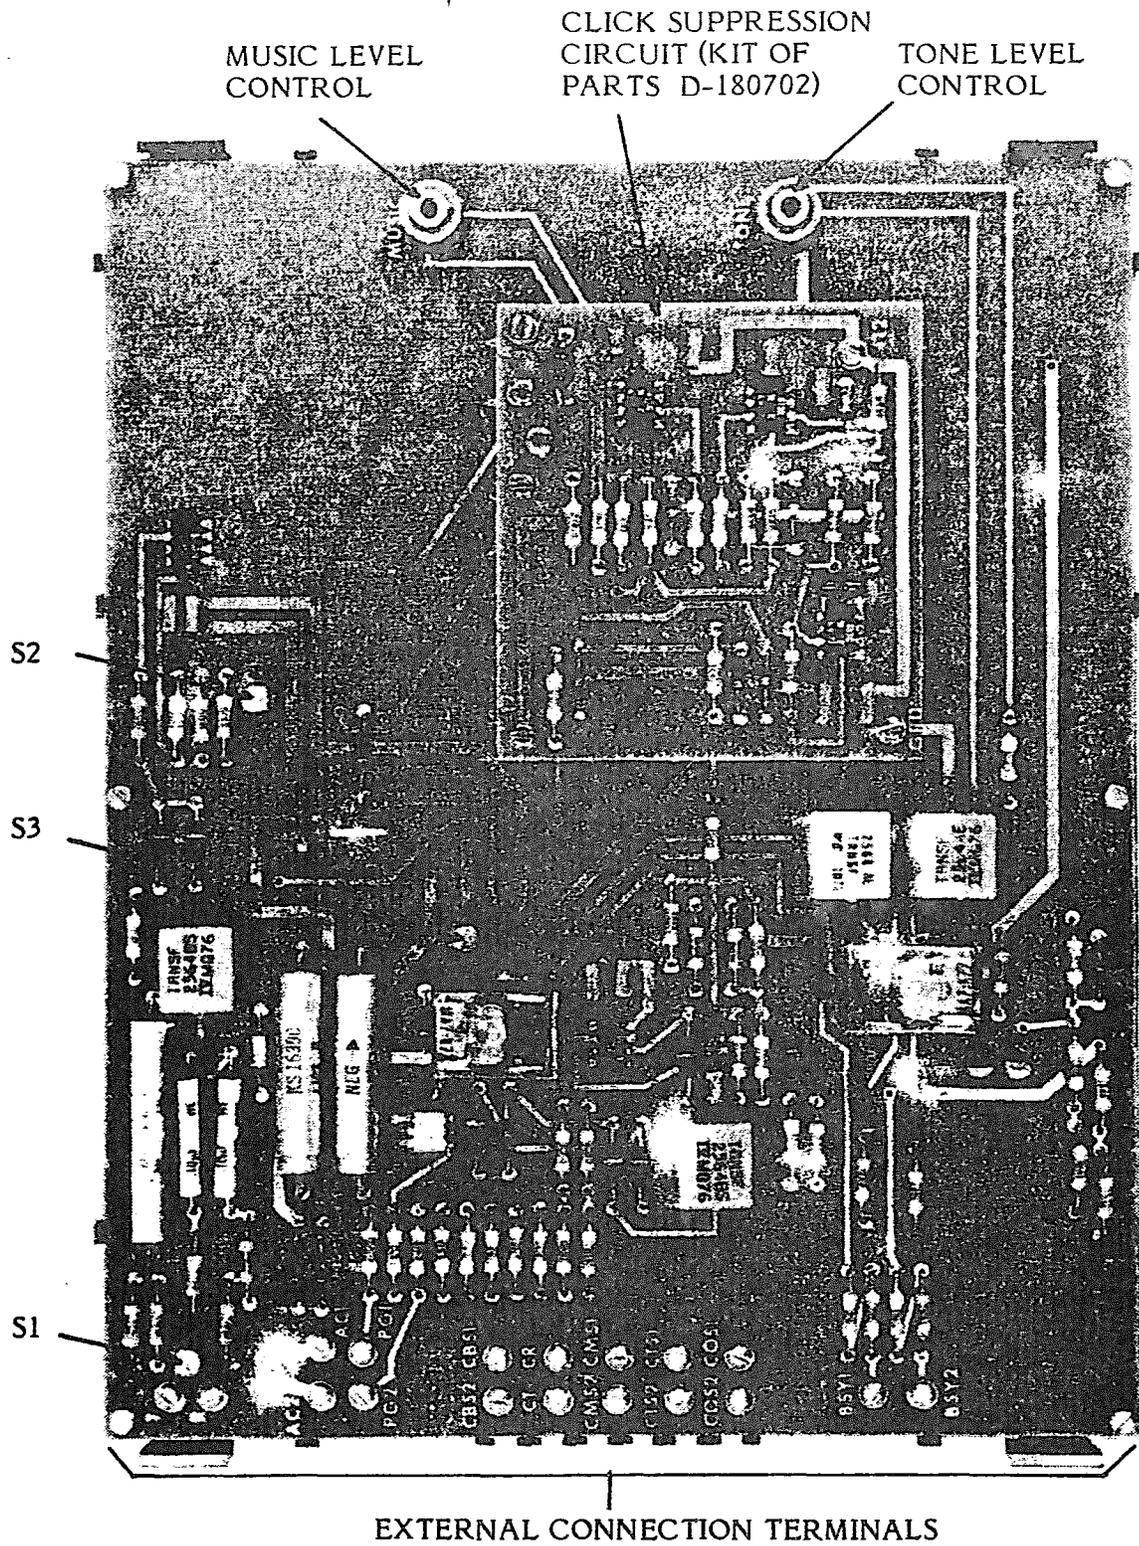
89A Control Unit, Mounted With Cover Removed
